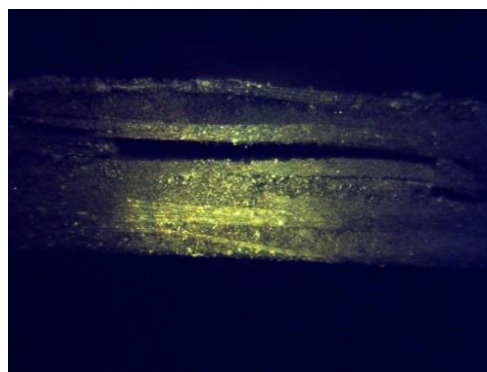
Carbon test piece analysed in the breakage zone after bending test
